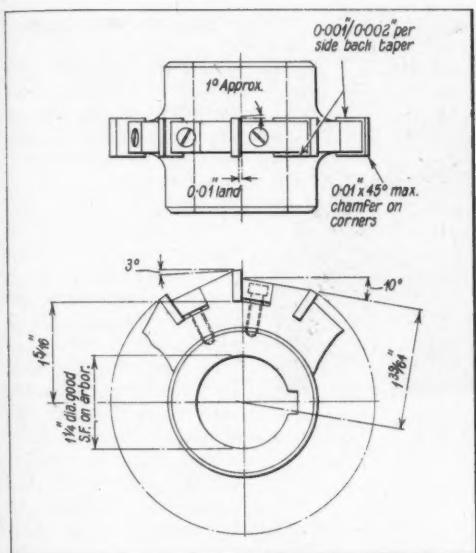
Details of the teeth of the cutter employed for milling notch bars are here shown
